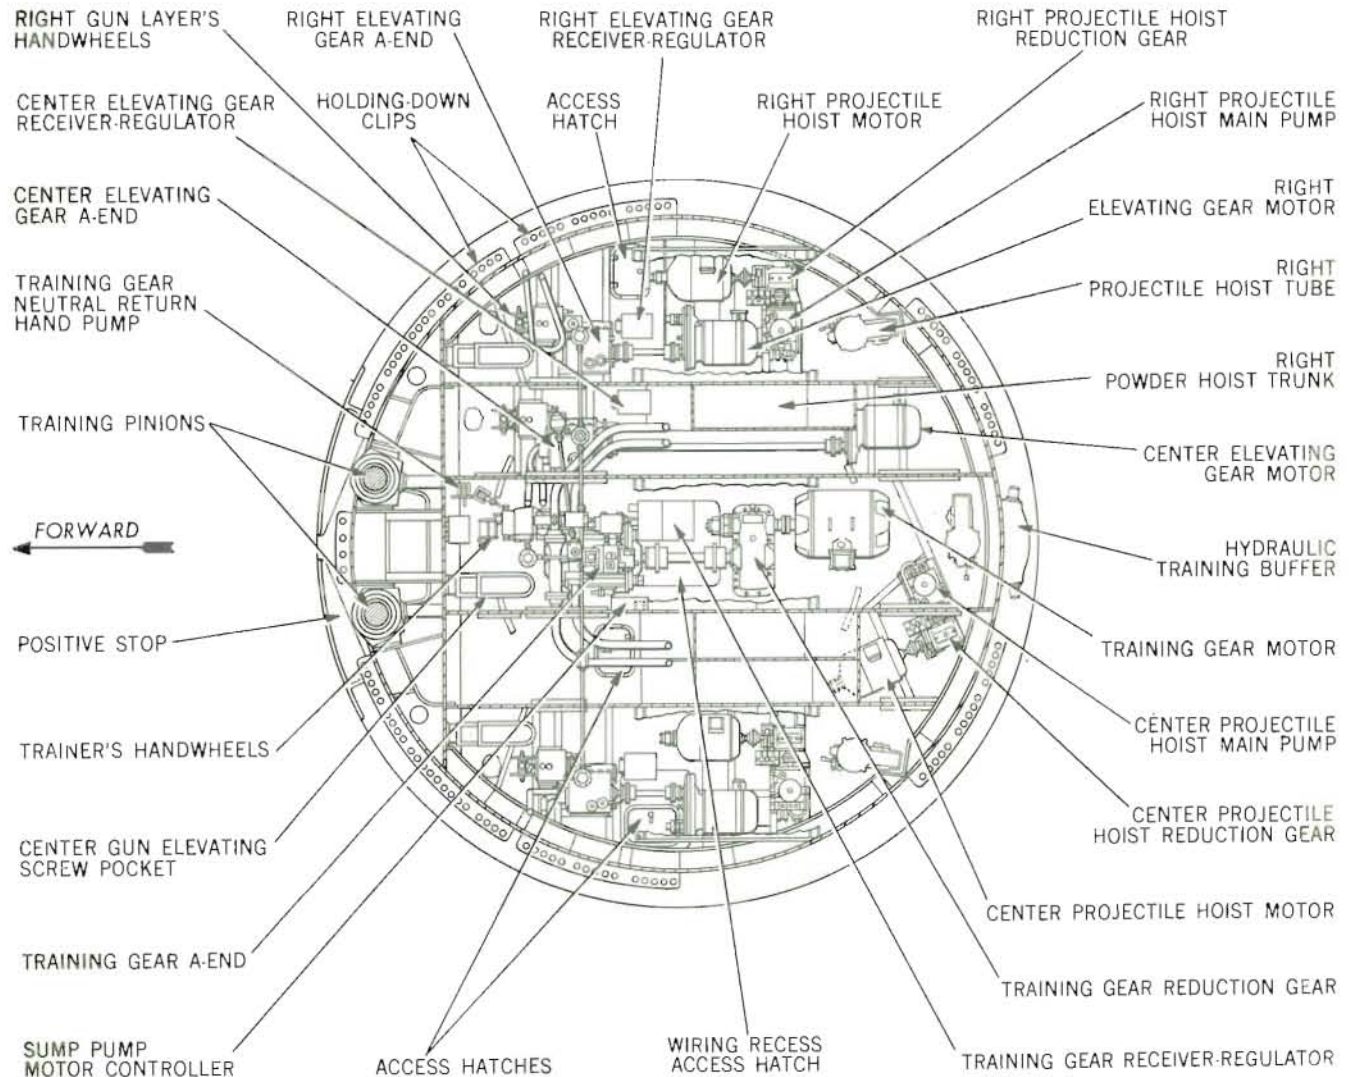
Ordnance Equipment on Electric Desk - General Arrangement - Plan View
